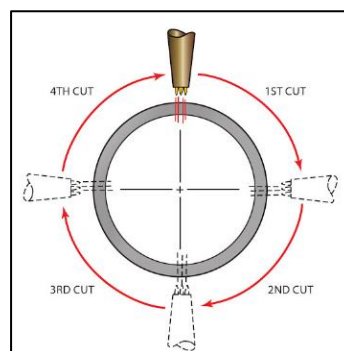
A large diameter pipe, torch is turned to keep it at a right angle to the line. Tube should be cut as far as possible before stopping and turning it.
